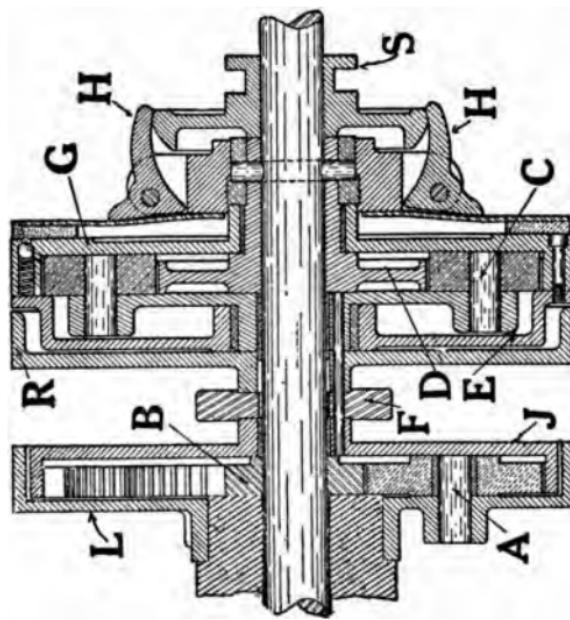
G.—Cross section of a typical planetary or epicyclic transmission equipped with internal gears, showing essential features of construction. B and D are spur gears keyed to the main shaft; A and C are spur pinions engaging them, and G and J are discs carrying internal gears which engage with the spur pinions A, C, etc. The brake drum, K, and the spider carrying pinion, C, and its mates, is integral with sprocket, F, and disc, J, carrying the gear meshing with pinion, A, and its mates. The gears, B and D, turn with the shaft, rotating the spider, J, carrying the gear A, and its mates, and the disc or drum, G, containing the internal gear meshing with C and its mates. Disc, J, and spider, E, do not rotate, because of the fact that they are integral with the sleeve carrying the sprocket, F, which is maintained stationary because of the fact that, on account of the relative positions of J and E, the rotating stress tends to drive it into two opposite directions, and with equal effort. When, however, the drum, or spider, L, is held stationary (Caption continued at bottom of page 255.)
